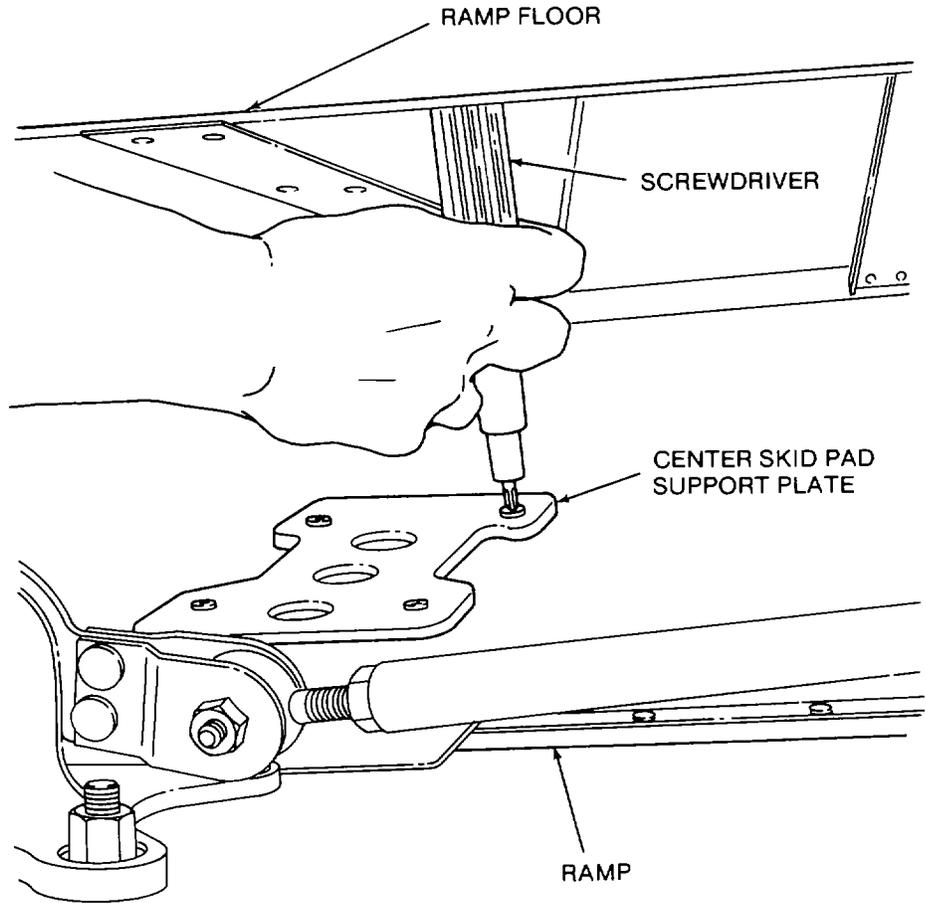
Screwdriver Location to Hold Center Skid Pad Screw Head
